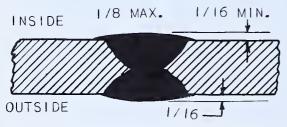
Appearance of Welded Seam after Chipping and Grinding
